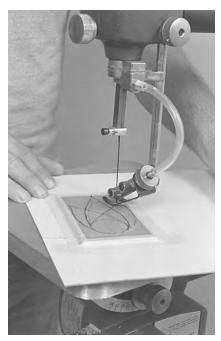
When cutting thin or small workpieces, tape them to a sheet of posterboard. This adds both support and control.
